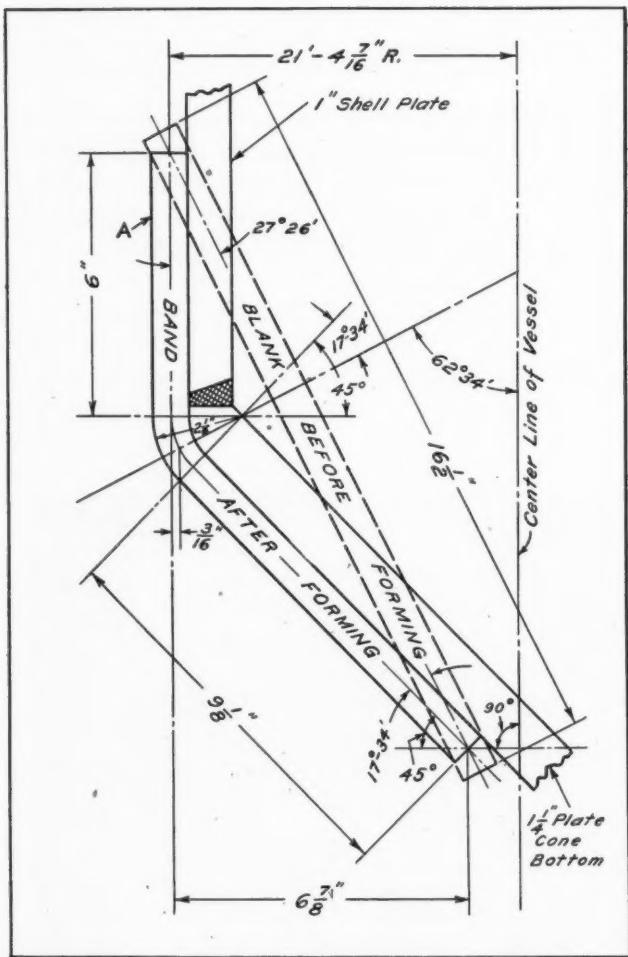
Outline of Cross-section through Formed Reinforcing Band A and Weld Joining Cylindrical Body and Conical Bottom of Vessel. Segments of Band A are Formed from Blanks such as Indicated by the Dotted Lines in Dies Shown in Fig. 2, the Center Line of the Press Stroke being at an Angle of 62 Degrees 34 Minutes with Axis or Center Line of Vessel
